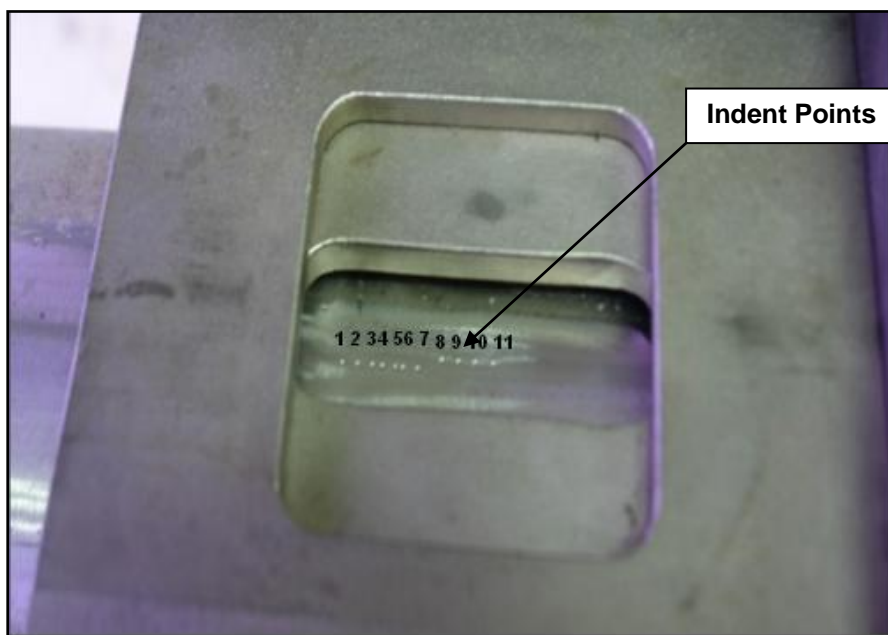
Final indentation points after ABI experiments on similar weld joint
